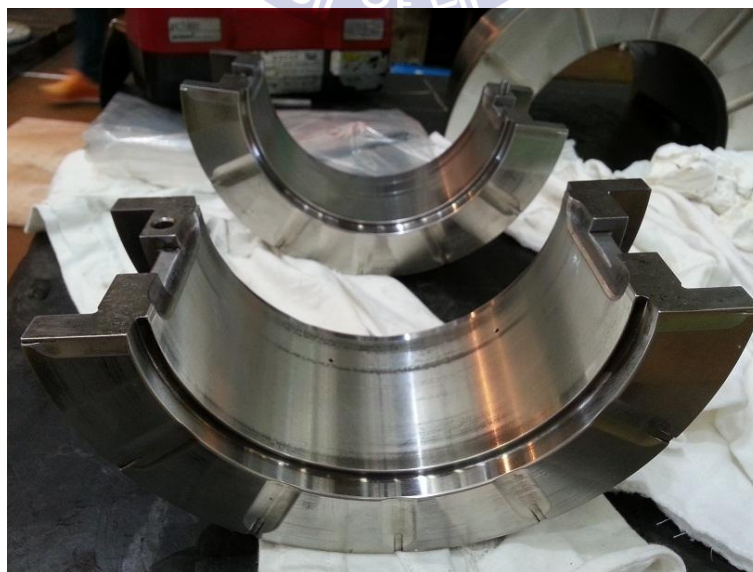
Thrust bearing face of input shaft⁵⁾
